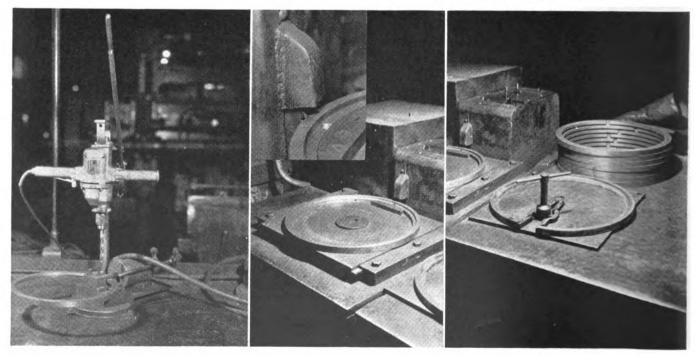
Left: Drilling the rings for dowel clearance—Center: Sawing the ring at the dowel-clearance hole; the insert is a close-up of the saw blade and guard—Right: The ring expander which expands the ring to approximately a 3/8-in. opening when at rest position. All these operations are performed on the bench shown at the left in the photograph at the head of this article
